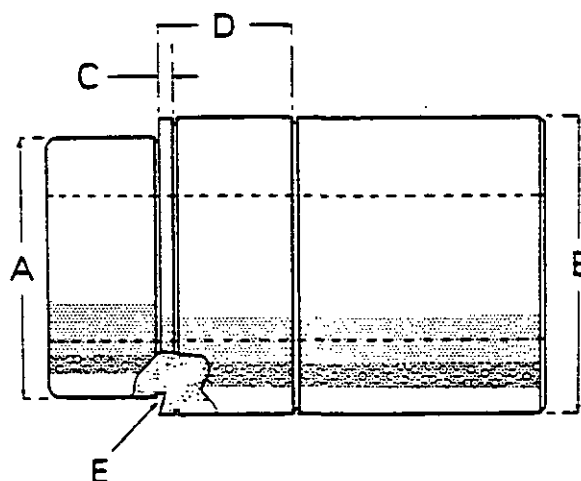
TOOL FOR FITTING 620052 NEEDLE ROLLER BEARING
